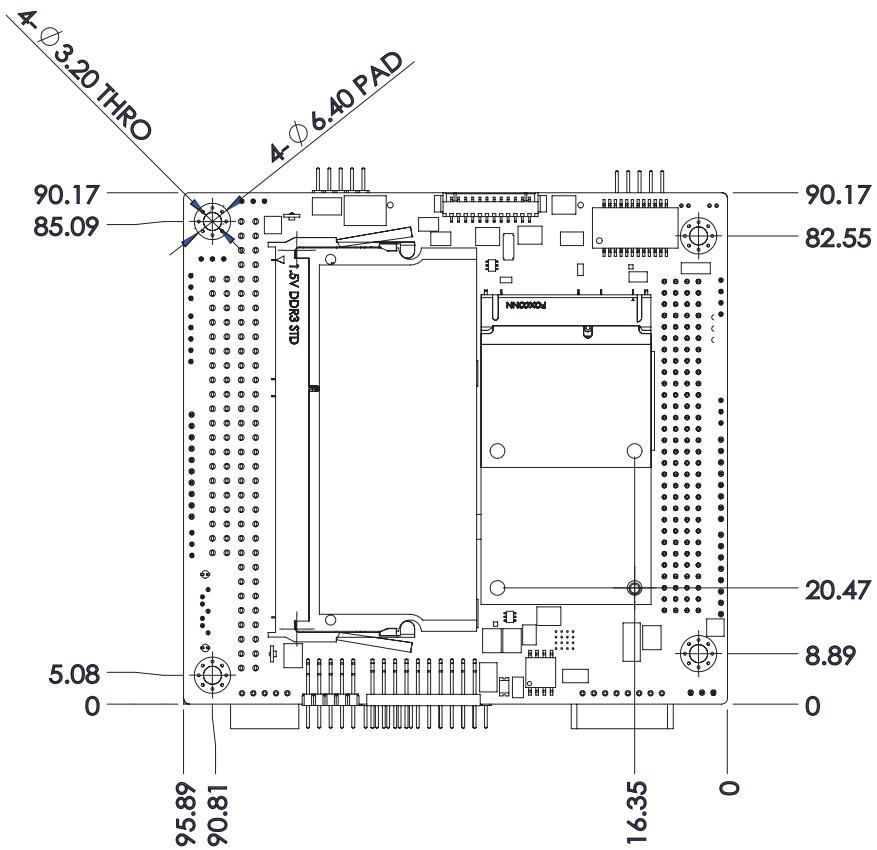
PCM-3365 Mechanical Drawing (Bottom Side)
